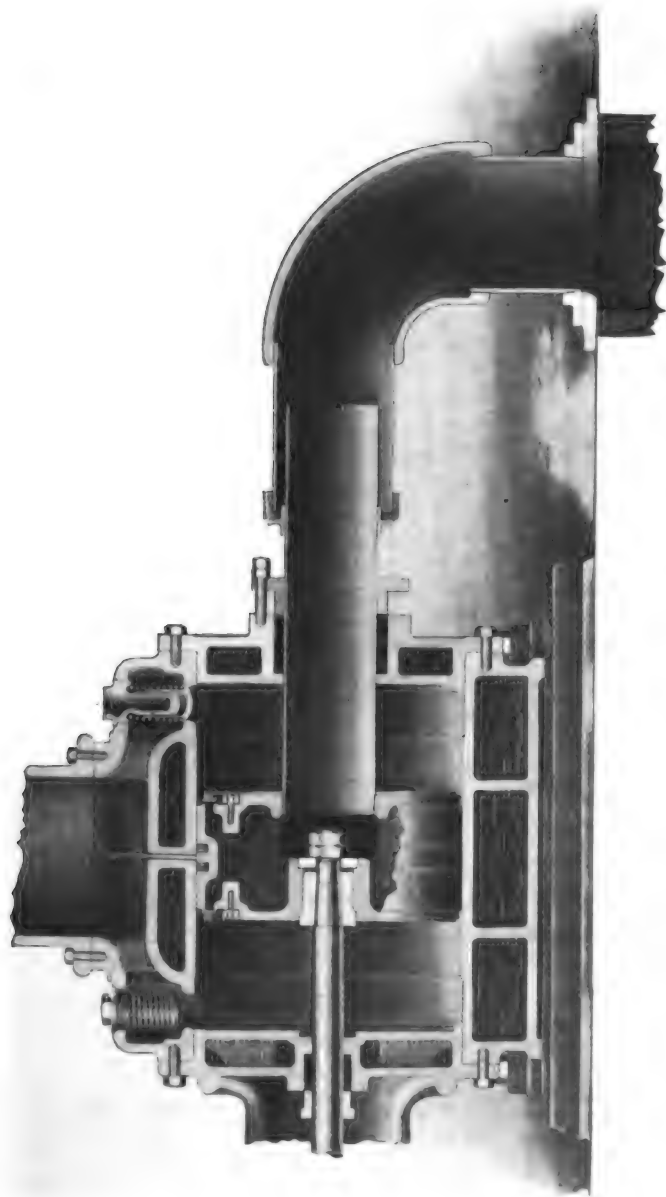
Ingersoll-Rand "Hurricane Inlet" Valve. Section of Cylinder and Piston, Showing Valves in Position.
